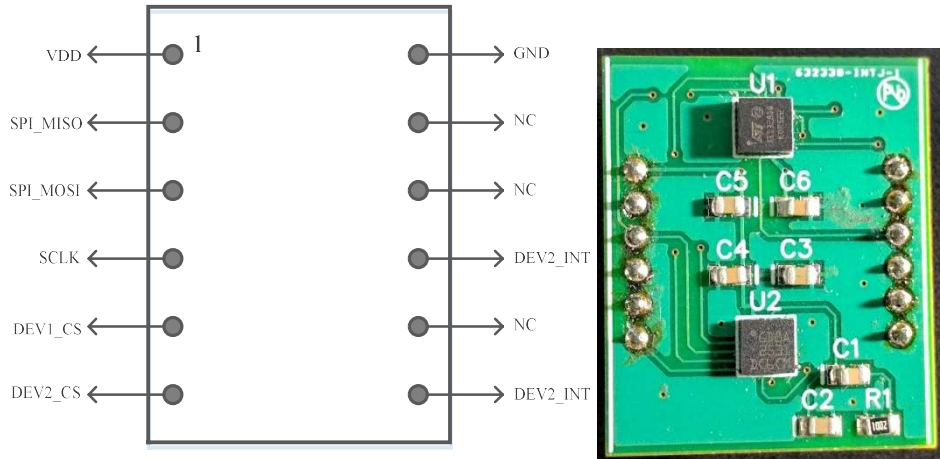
Example of pinout for two SPI devices(Left) Picture of implemented PCB (Right)
